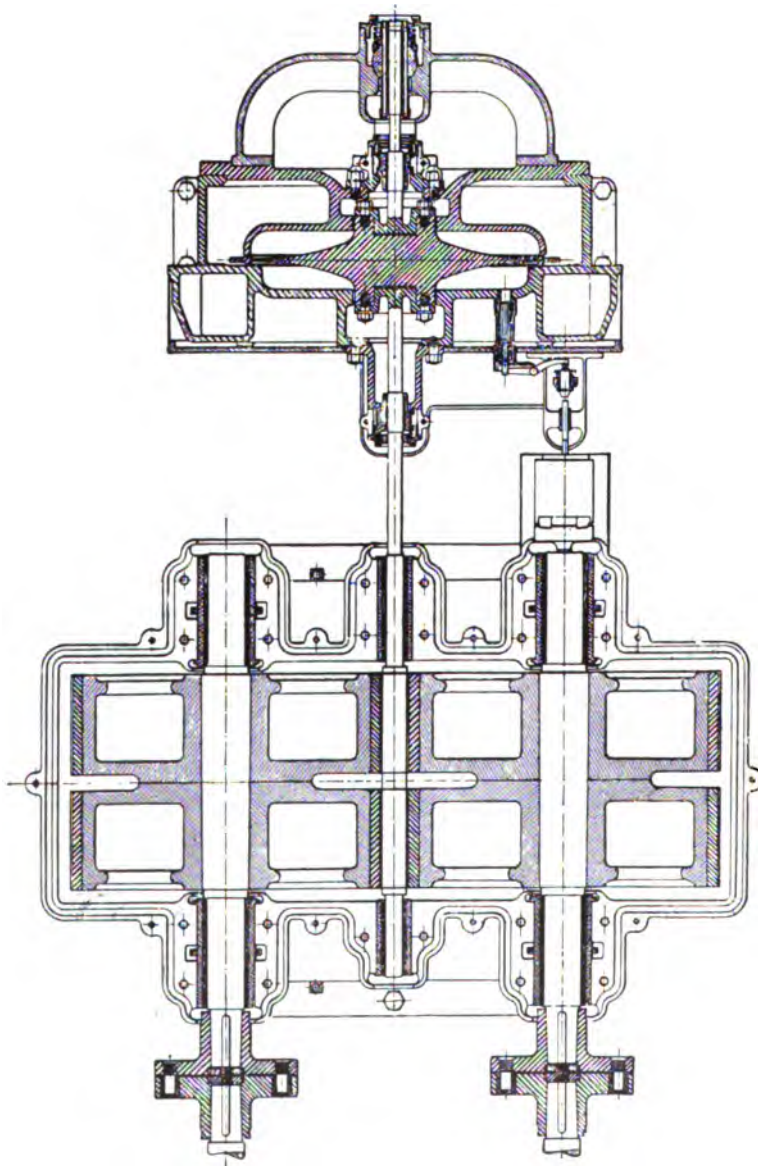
Sectional Plan of 300 H.P. De Laval Steam Turbine.
